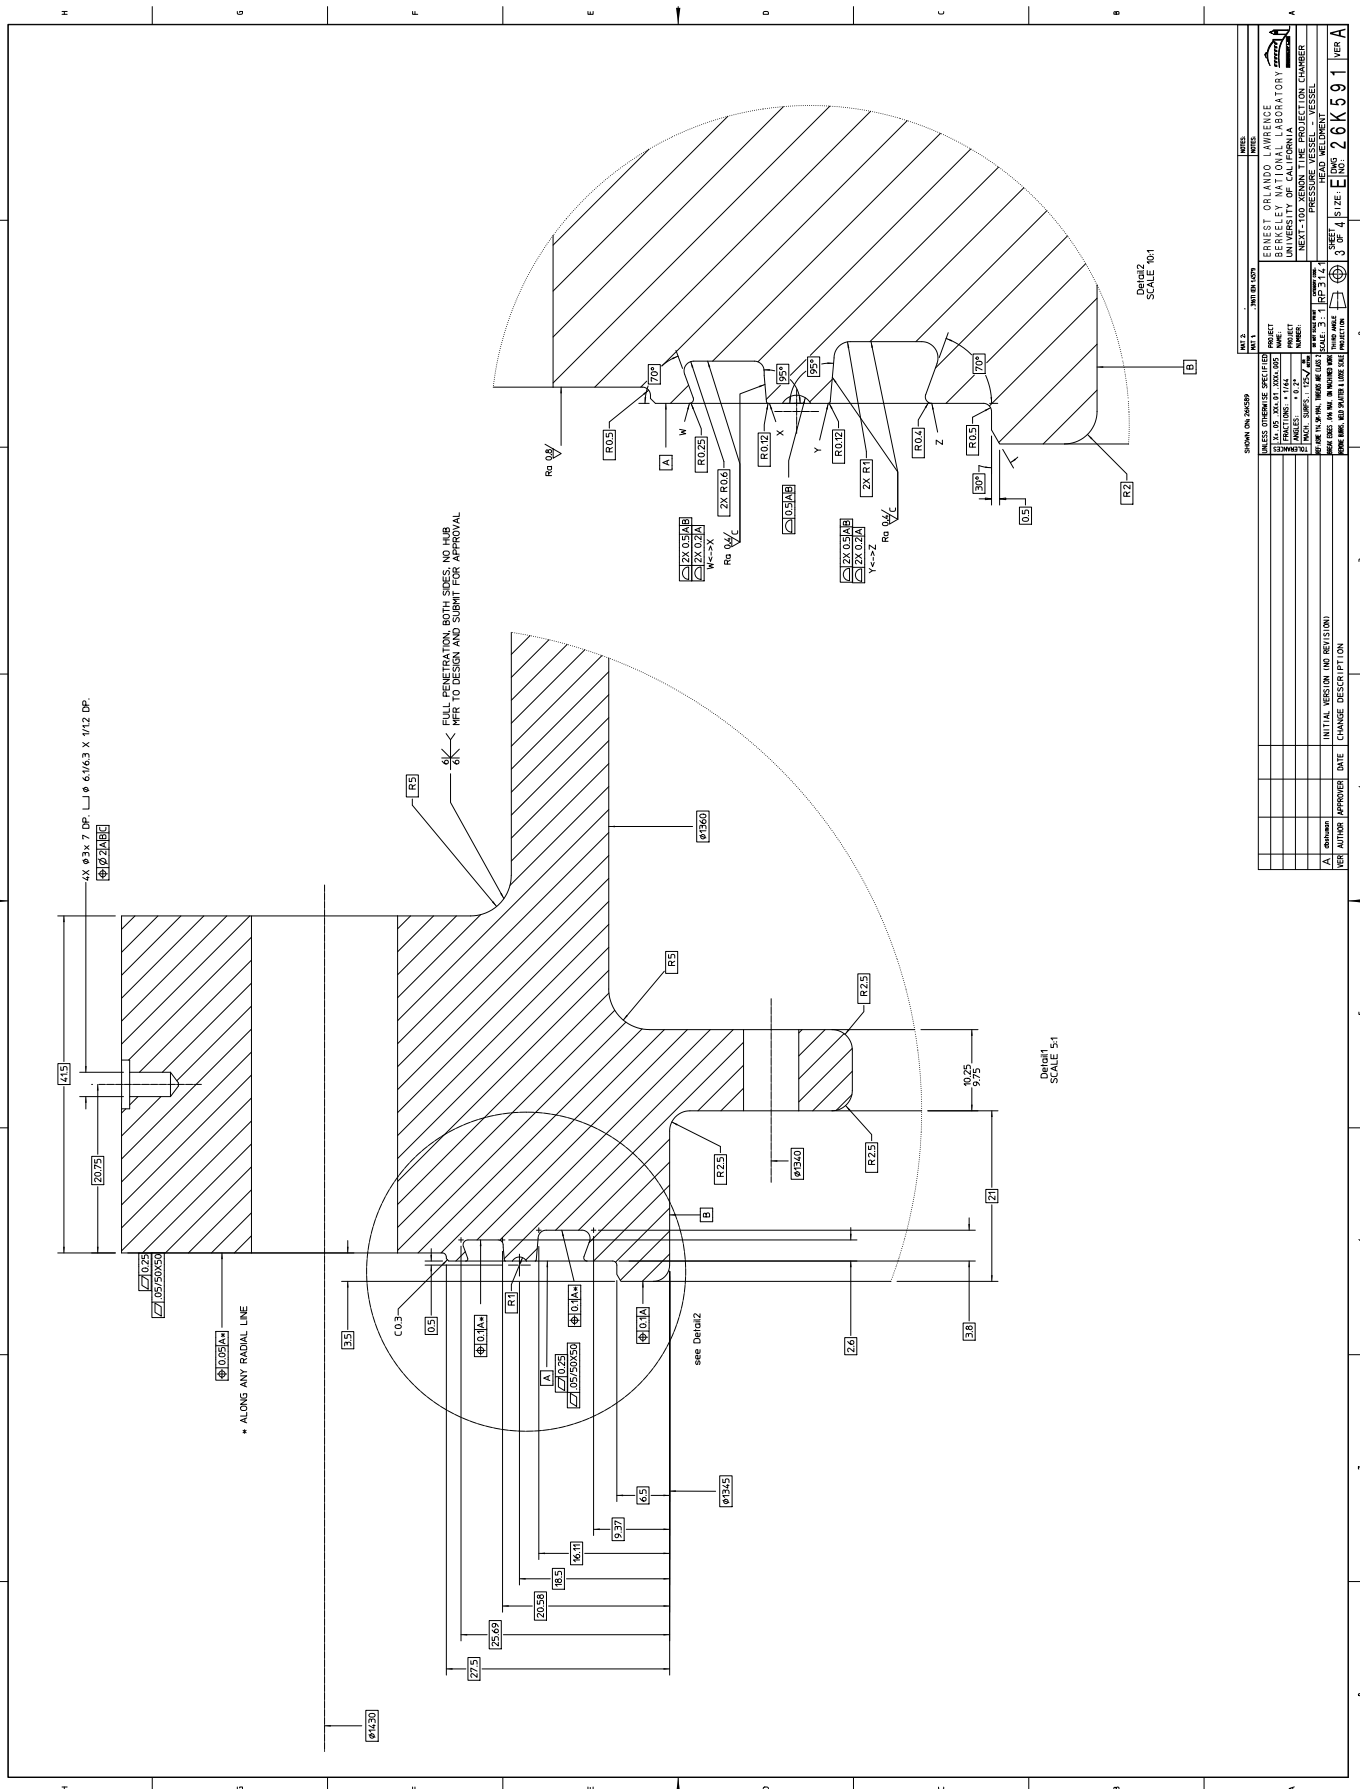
Torispheric Head Weldment, sheet 3
